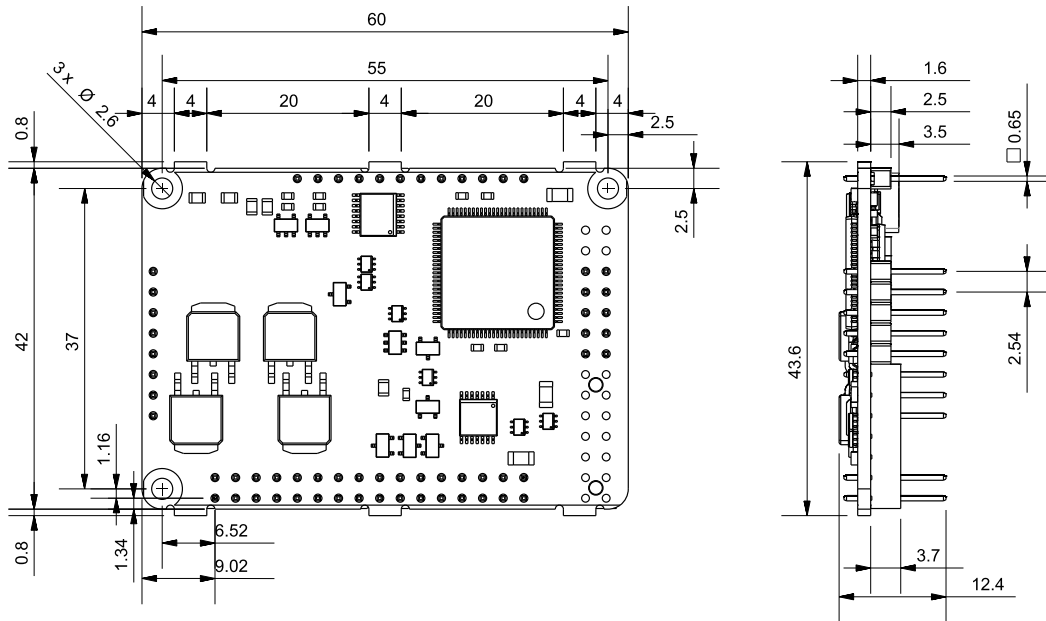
iPOS4808 MY-CAN drive dimensions
